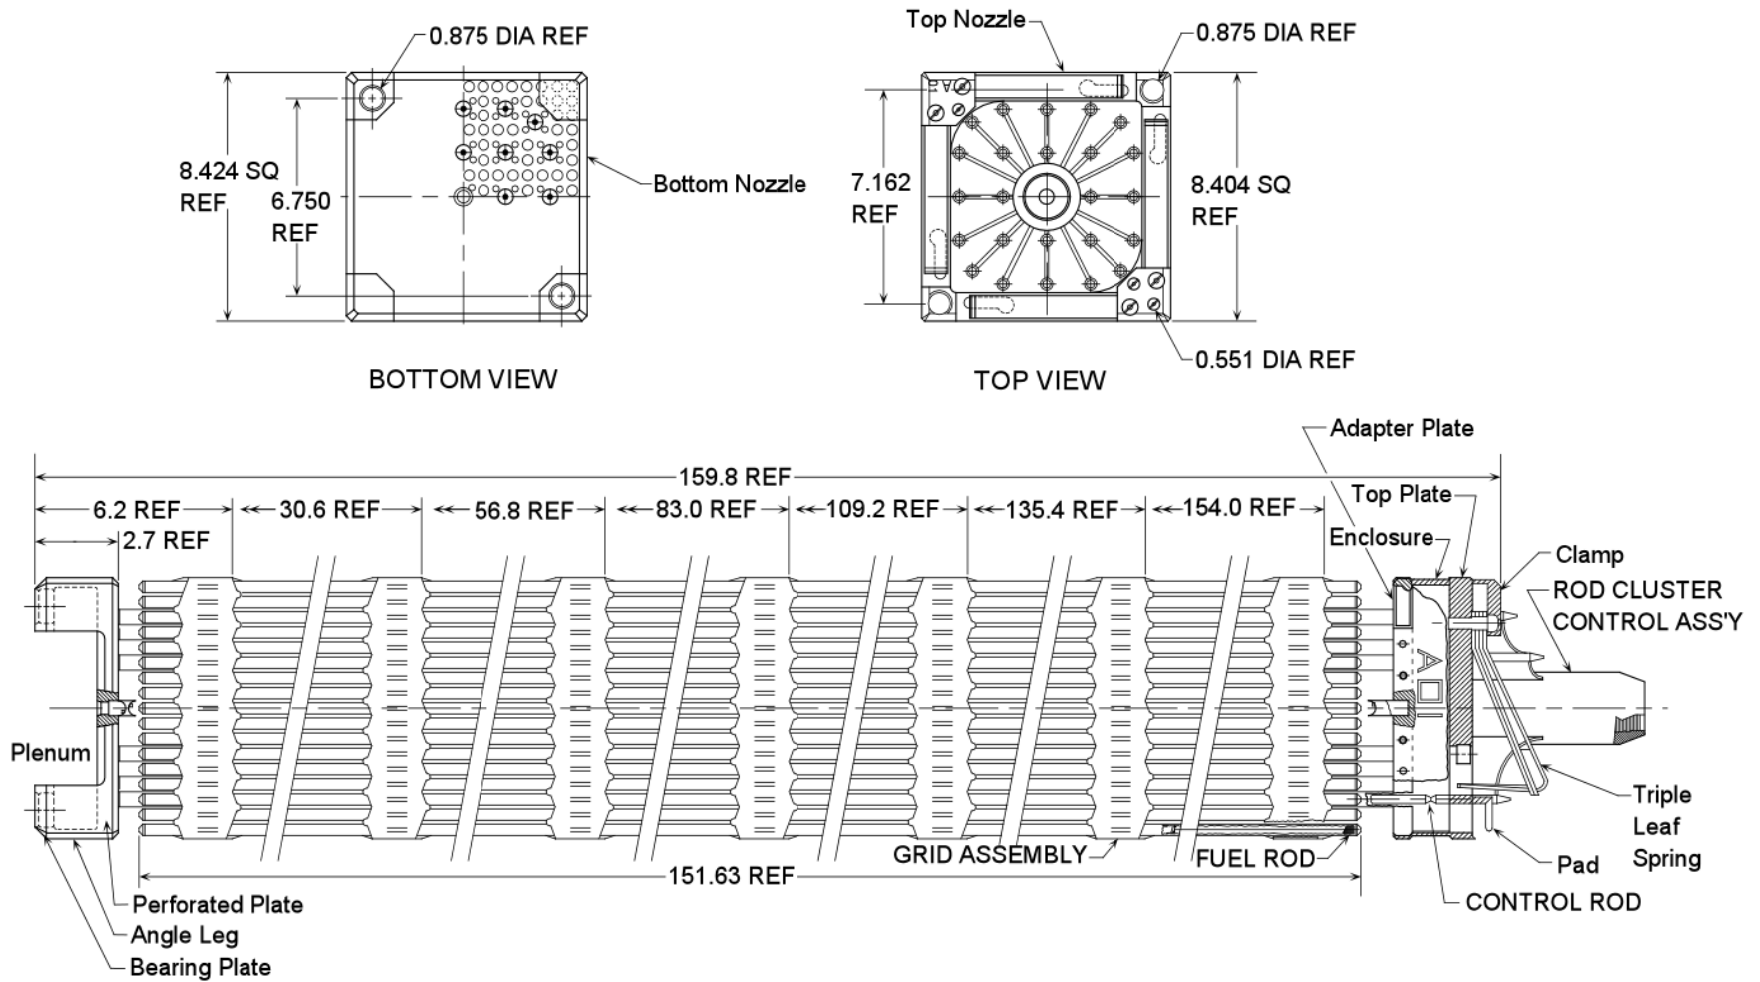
Fuel Assembly and RCCA Cutaway
